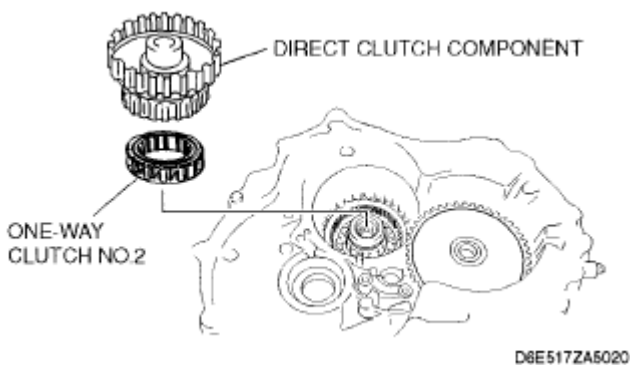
View Of Direct Clutch Component And One-Way Clutch No.2
